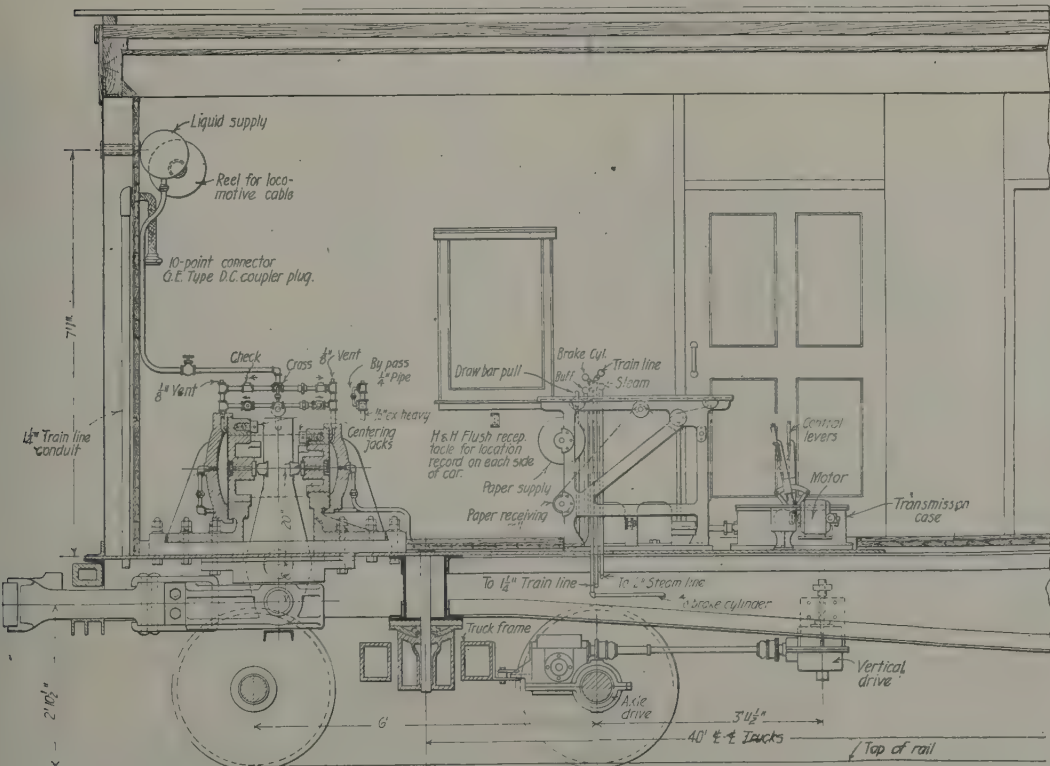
Longitudinal Section Through Forward End of Dynamometer Car.
